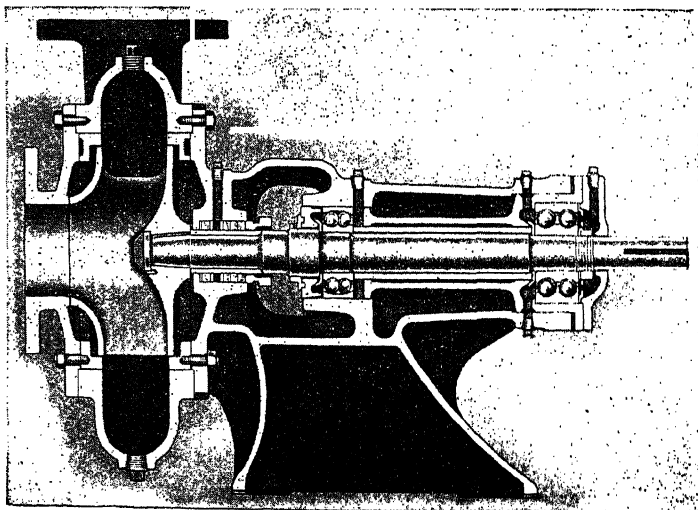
Sectional view of trash pump. (Courtesy Fairbanks-Morse Co.)
